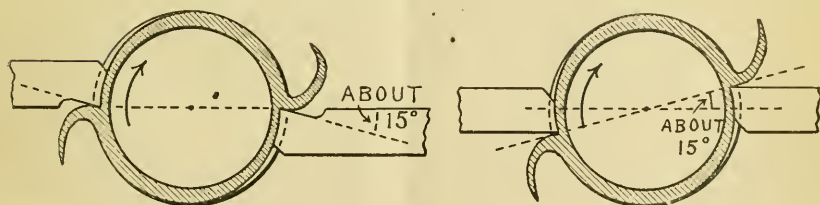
OLD FORM OF CHASER, FOR IRON PIPE.
